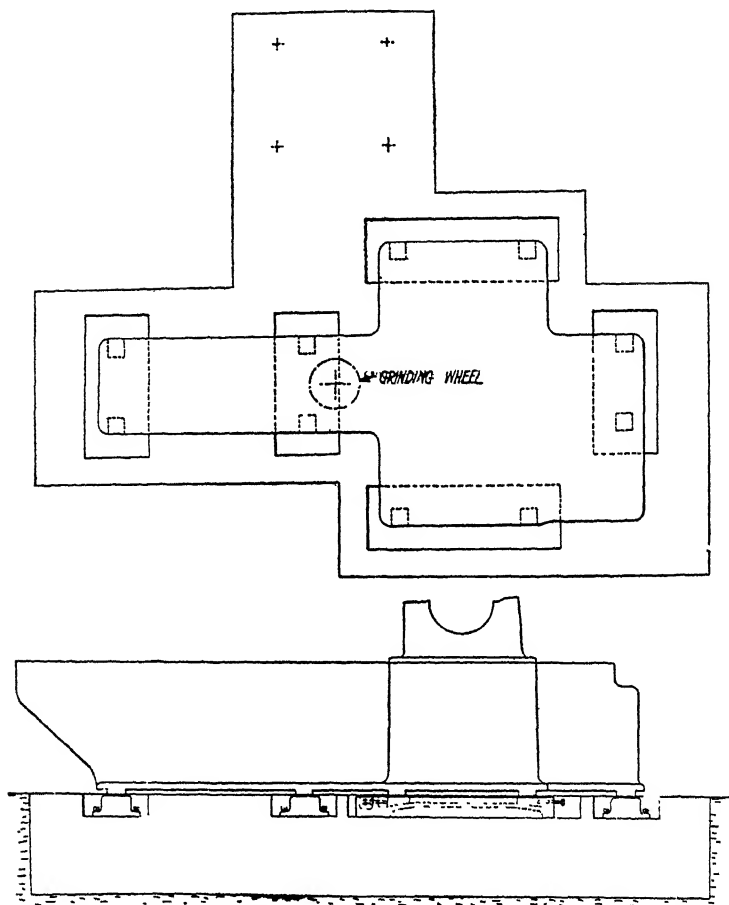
HALF-ELEVATION AND END VIEW OF GRINDING-MACHINE BASE
